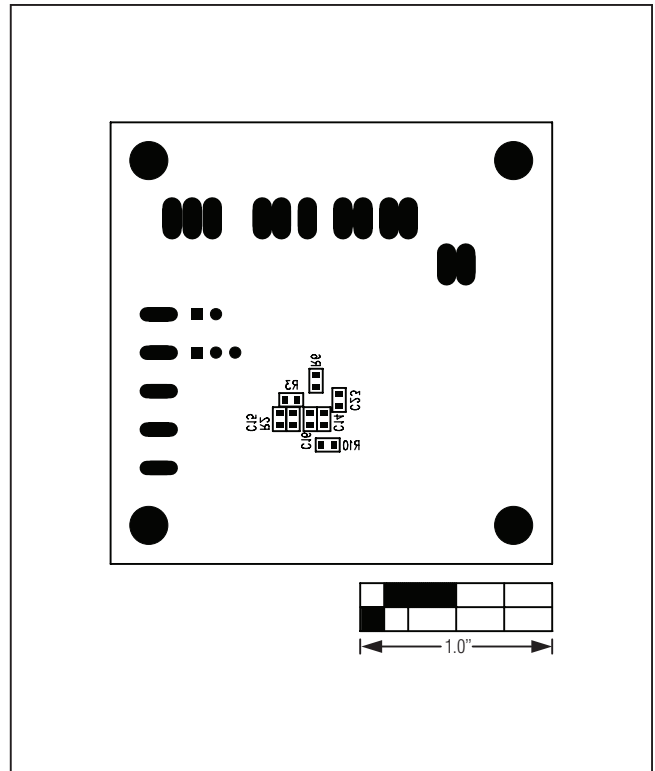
MAX15108 EV Kit Component Placement Guide—Solder Side
